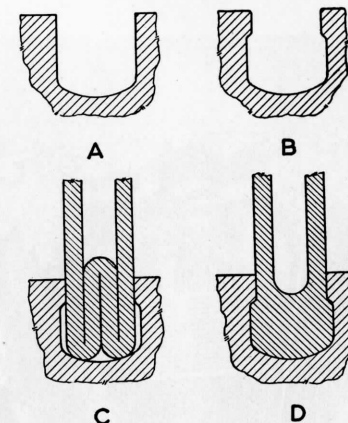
Connecting W-shaped sheet metal fins to a steel cylinder.
